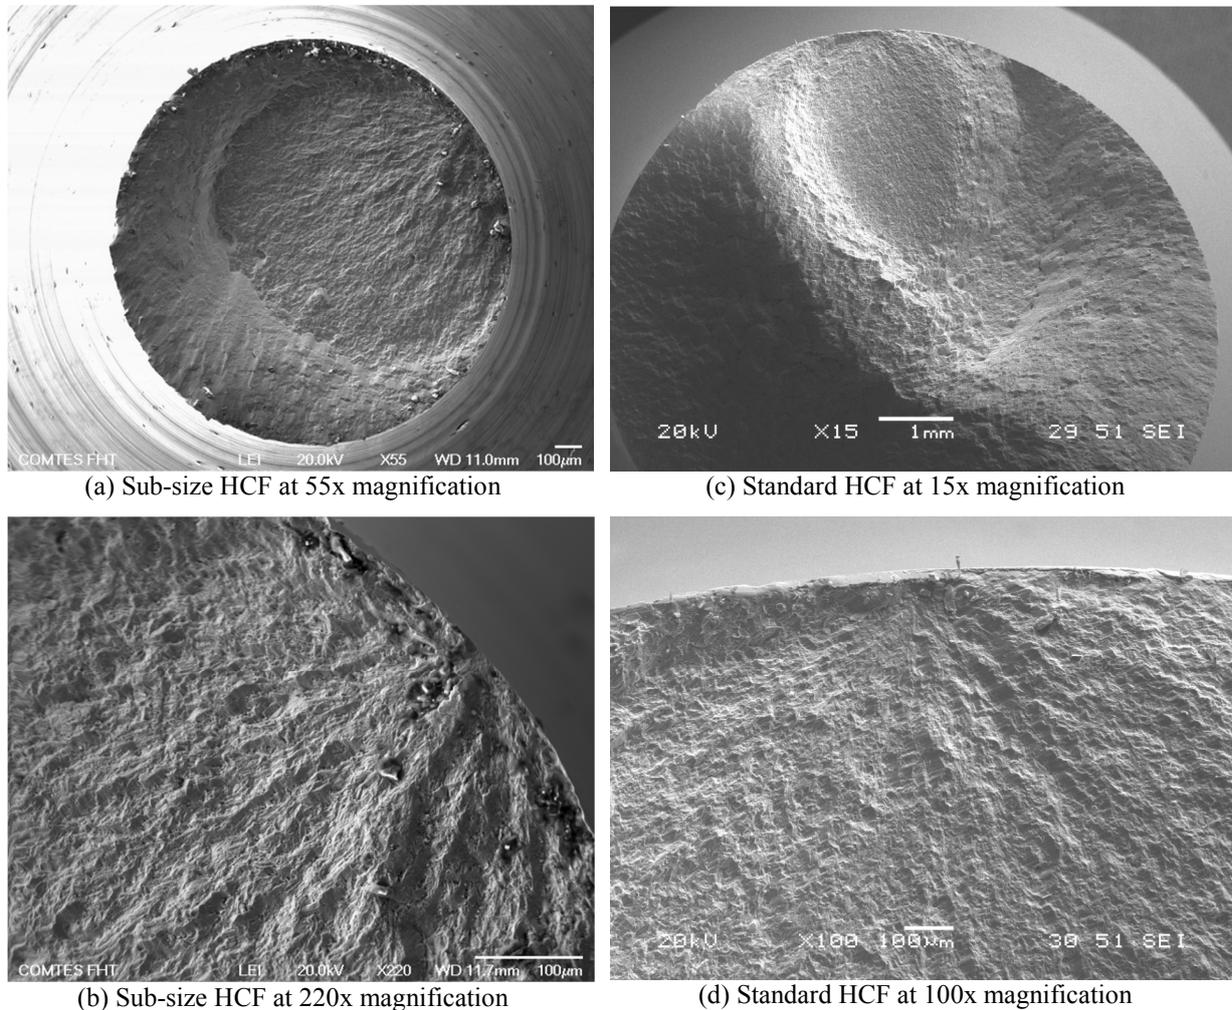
Fracture surface morphology of broken high cycle fatigue samples
